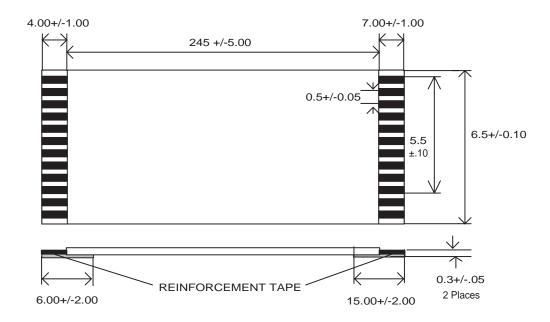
Flex Strip, p/n 50-16000-134 (Even Width, 245 mm)
